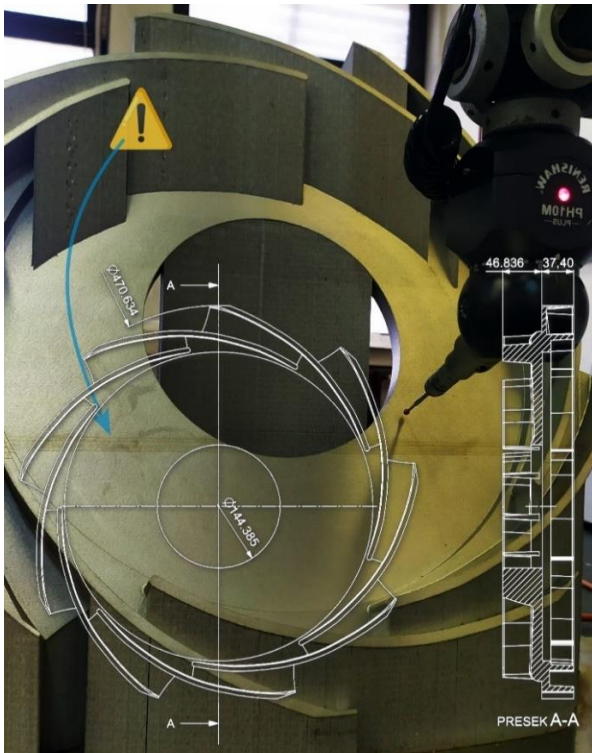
Diffuser N°3 on the CMM & touch trigger probe measuring path
